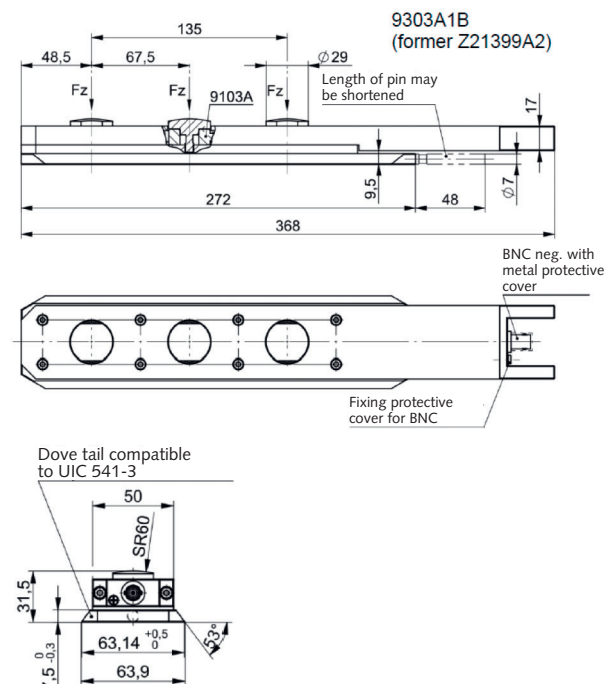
Type 9303A1B brake force measuring element for disc brakes
